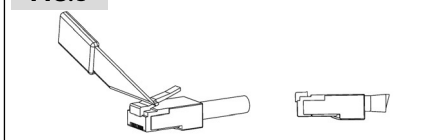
• Crop the latching clip on the RJ45 ensuring this is completely removed.
